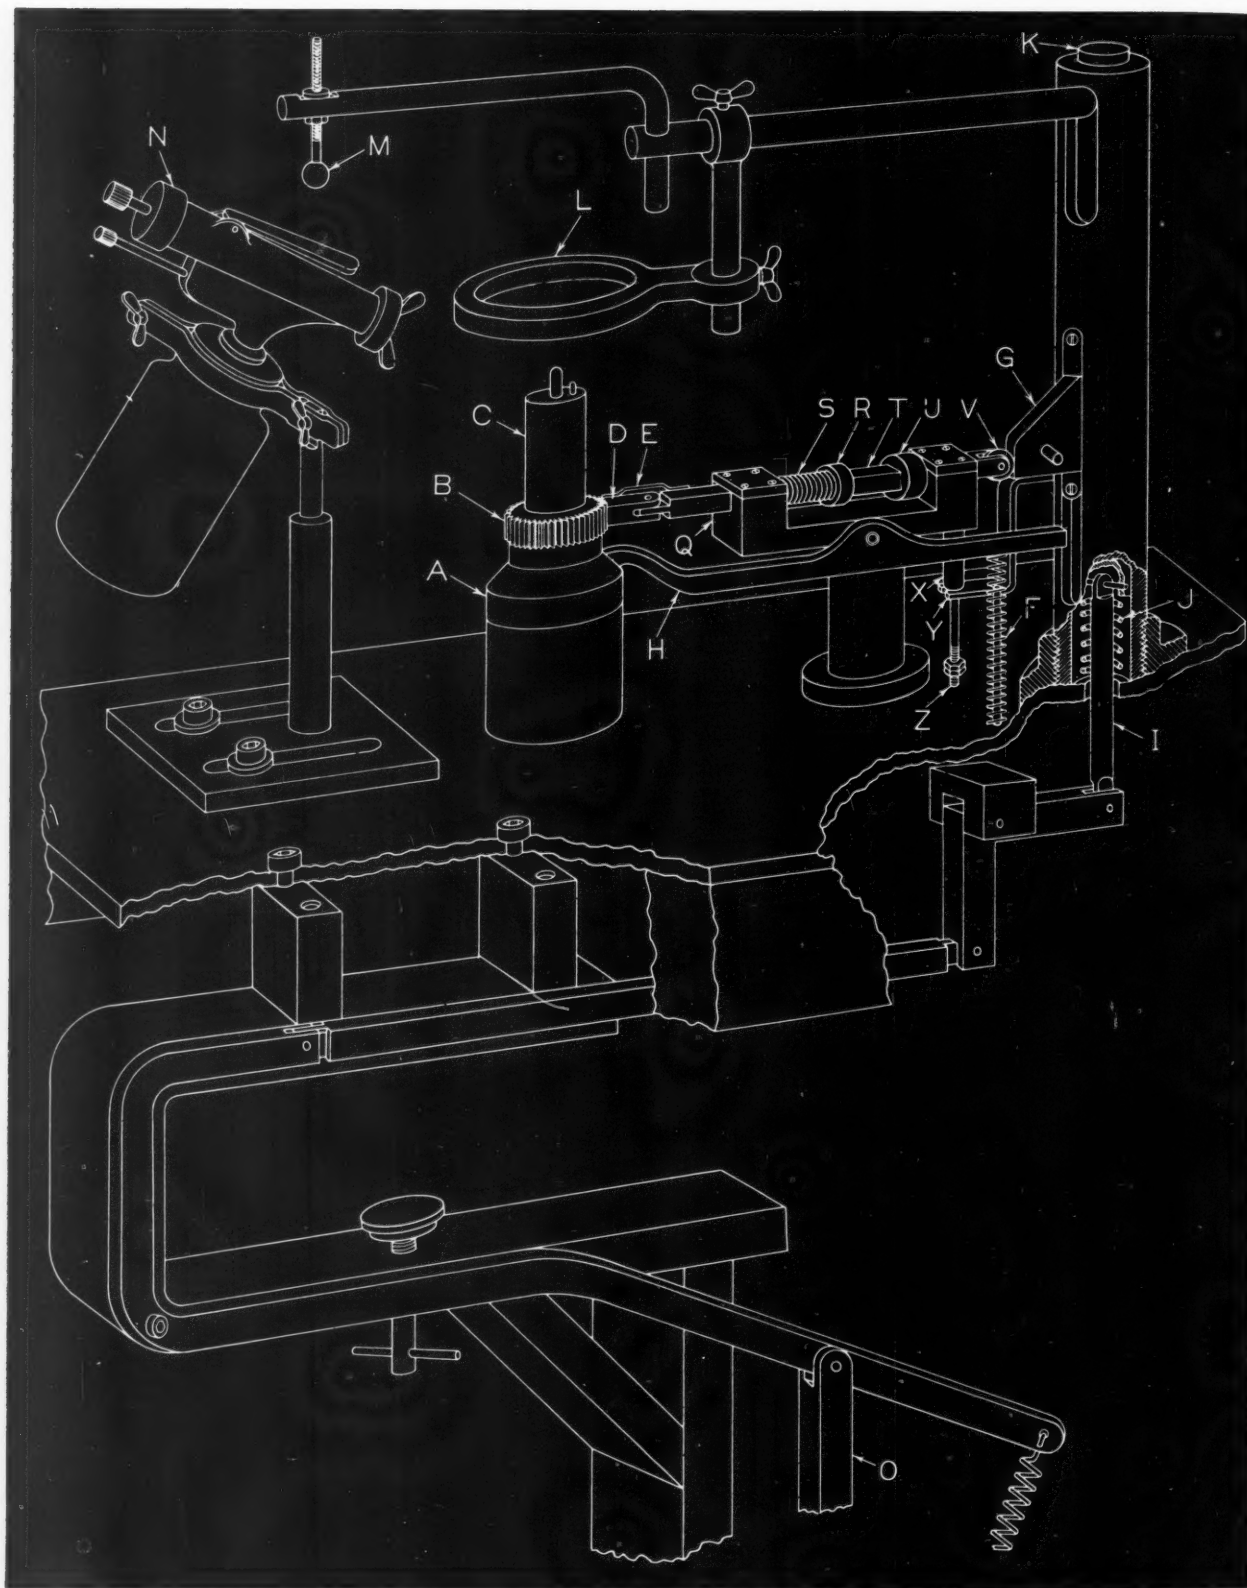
Diagrammatic illustration of semi-automatic machine developed for spraying coating on selected inner surfaces of camera lens adapters and hoods, such as shown in Fig. 1
